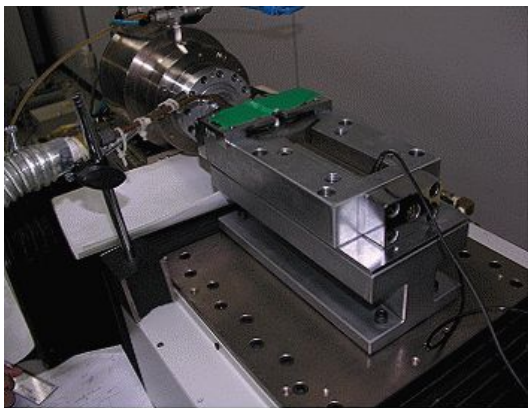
Photograph of diamond turning of toric surface with LFTS
